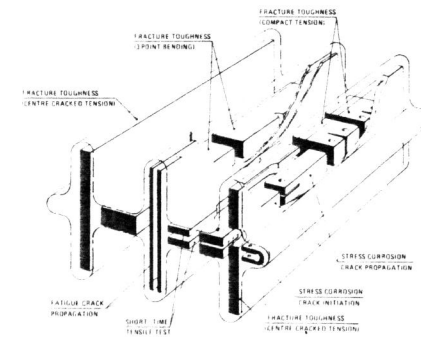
The general appearance of a forging and the type and position of the test specimens used to evaluate engineering properties
